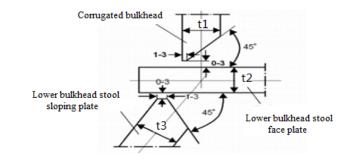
Joint design in way of face plate of lower bulkhead stool of corrugated bulkhead
